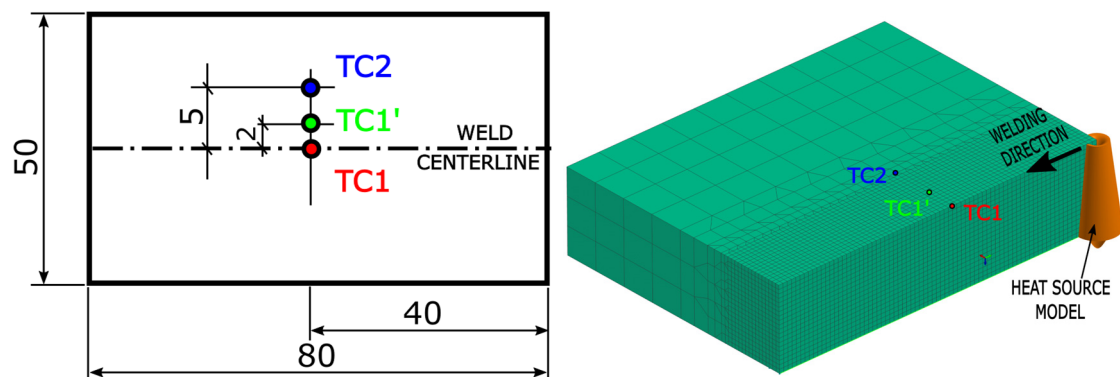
Scheme of the arrangement of thermocouples on the bottom of samples welded with a disc laser beam (TC1'—additional thermocouple in the case of a fully penetrated sample).
